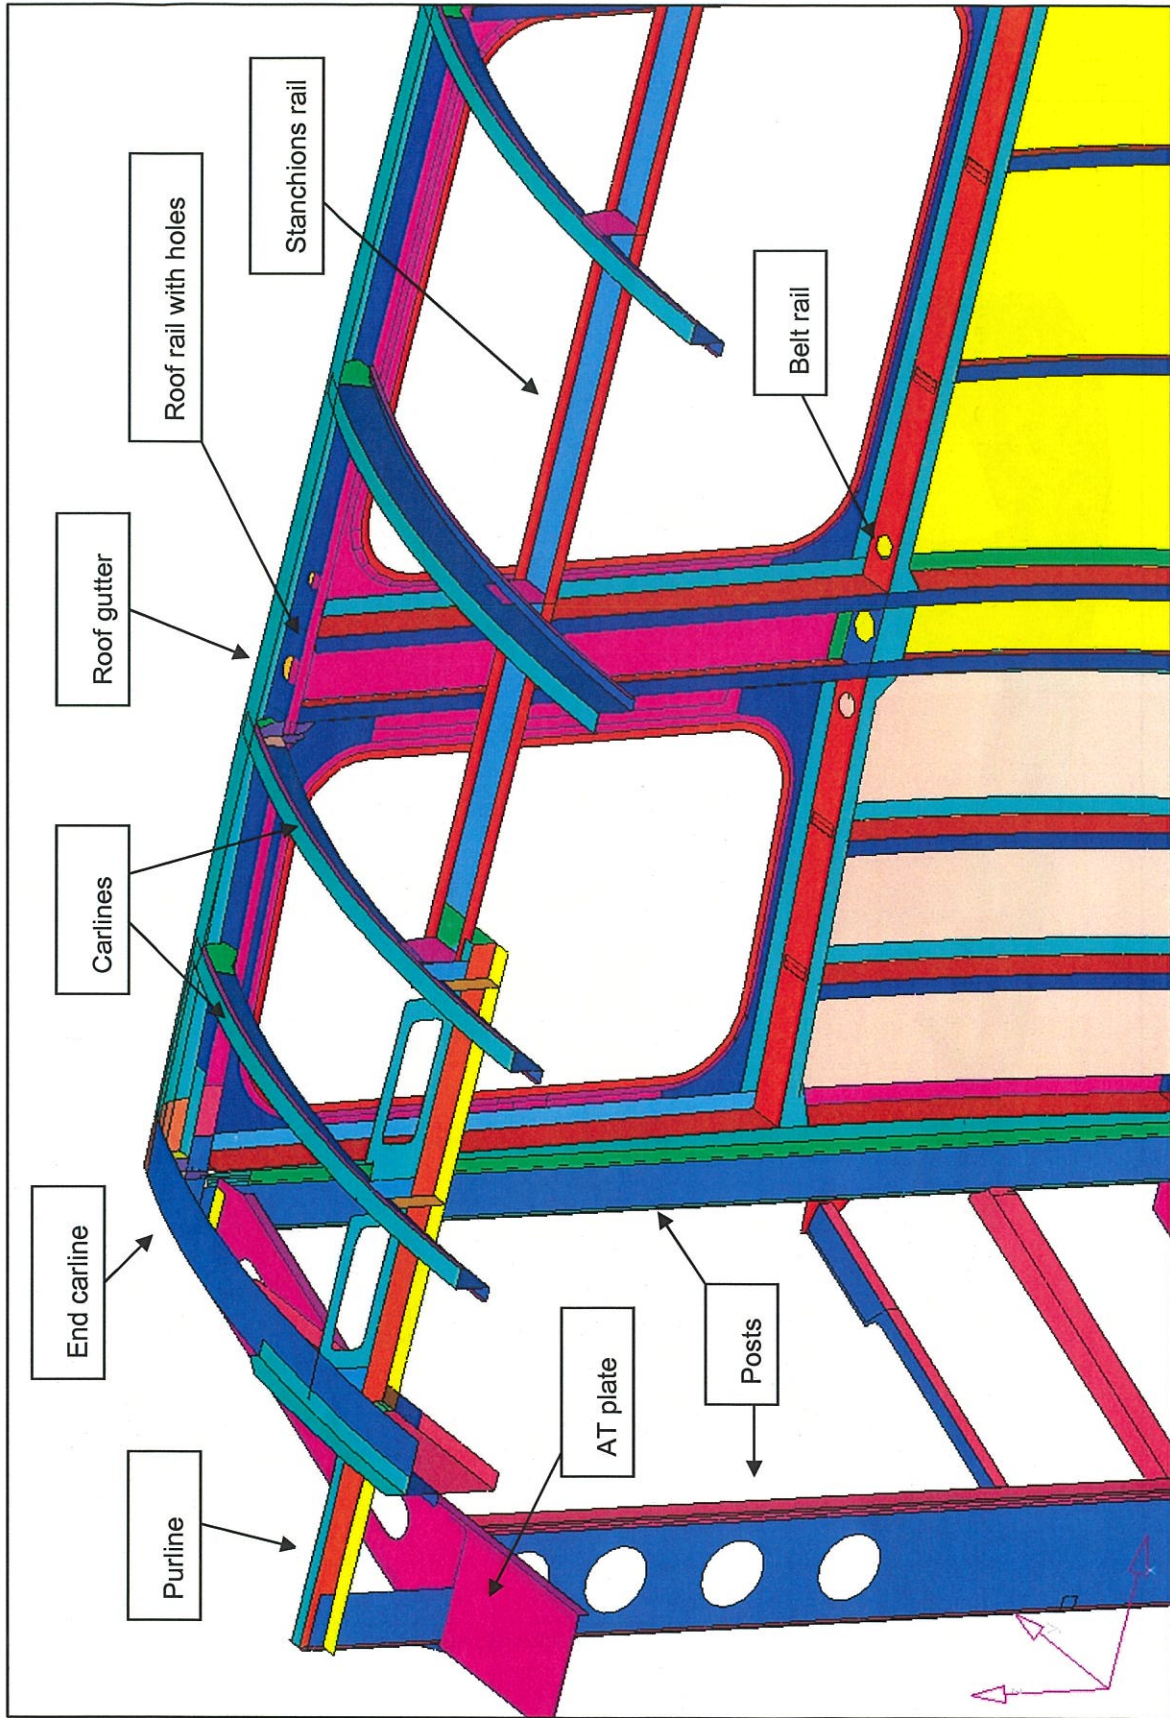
FEA of Endframe # 1 modeling detail of roof (roof corrugation is not shown).
